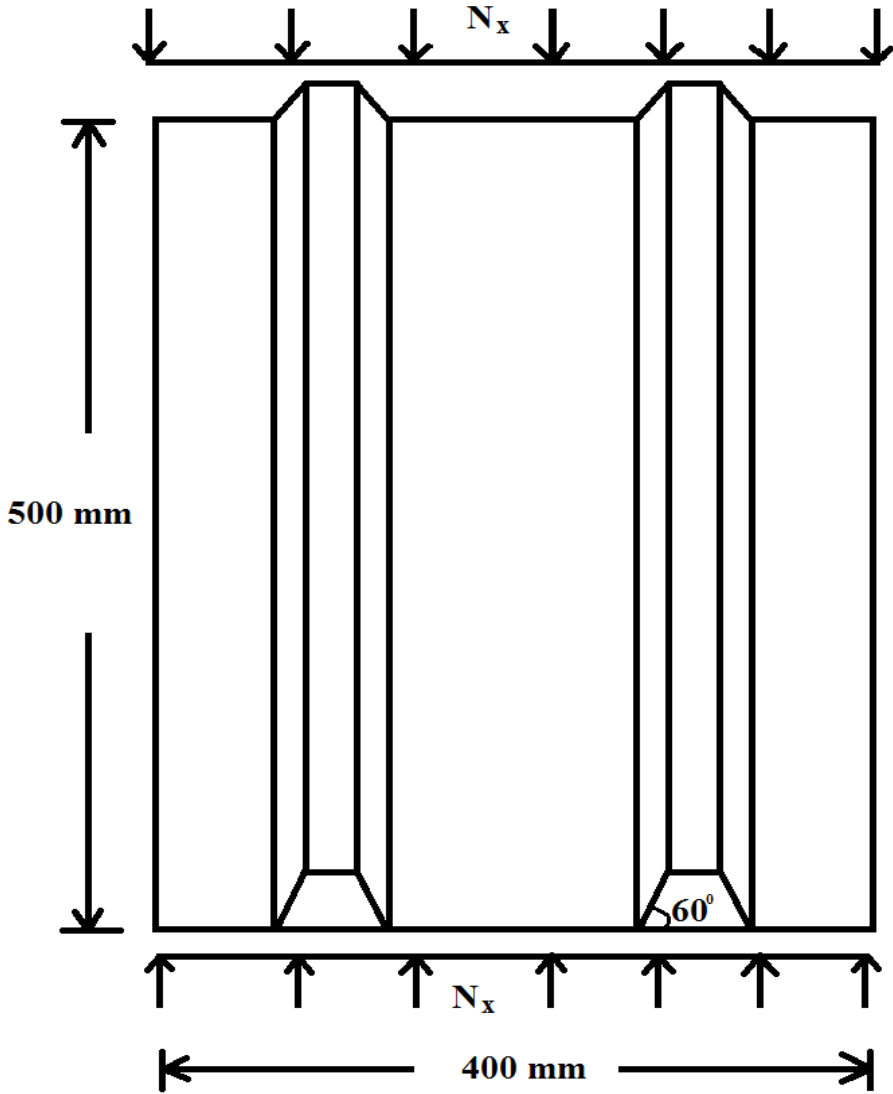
The structural geometry of the laminated composite 60⁰-hat stiffened panel.
